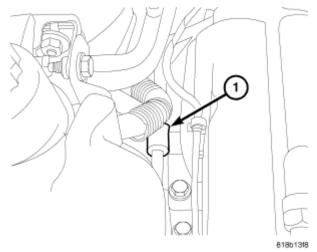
POWER STEERING LINE SUPPORT Courtesy of CHRYSLER LLC
